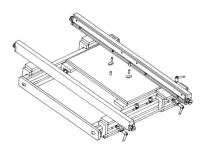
Guide frame that positions the circuit board for the press-in die
